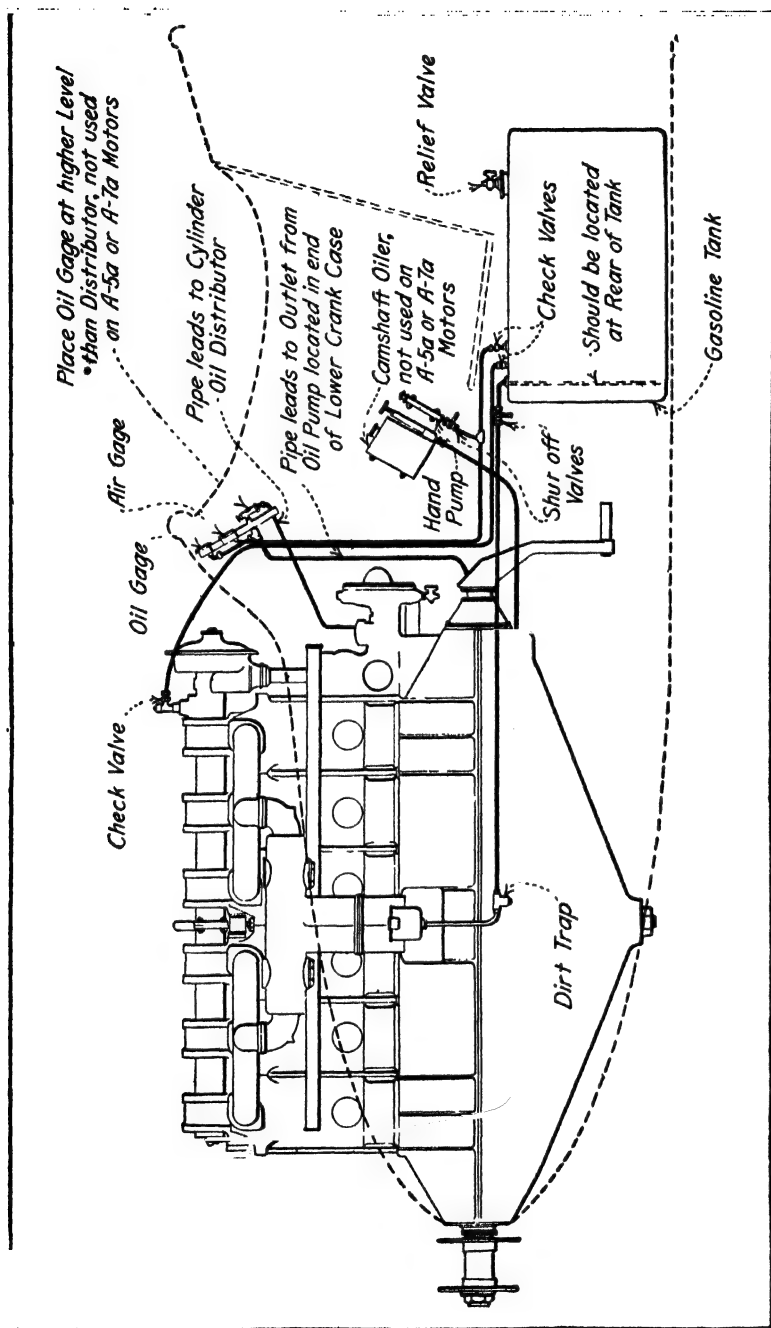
Diagram Showing Hall-Scott Type A5, 125 Horsepower Engine with Pressure Feed Fuel Supply System, an Early Installation.
